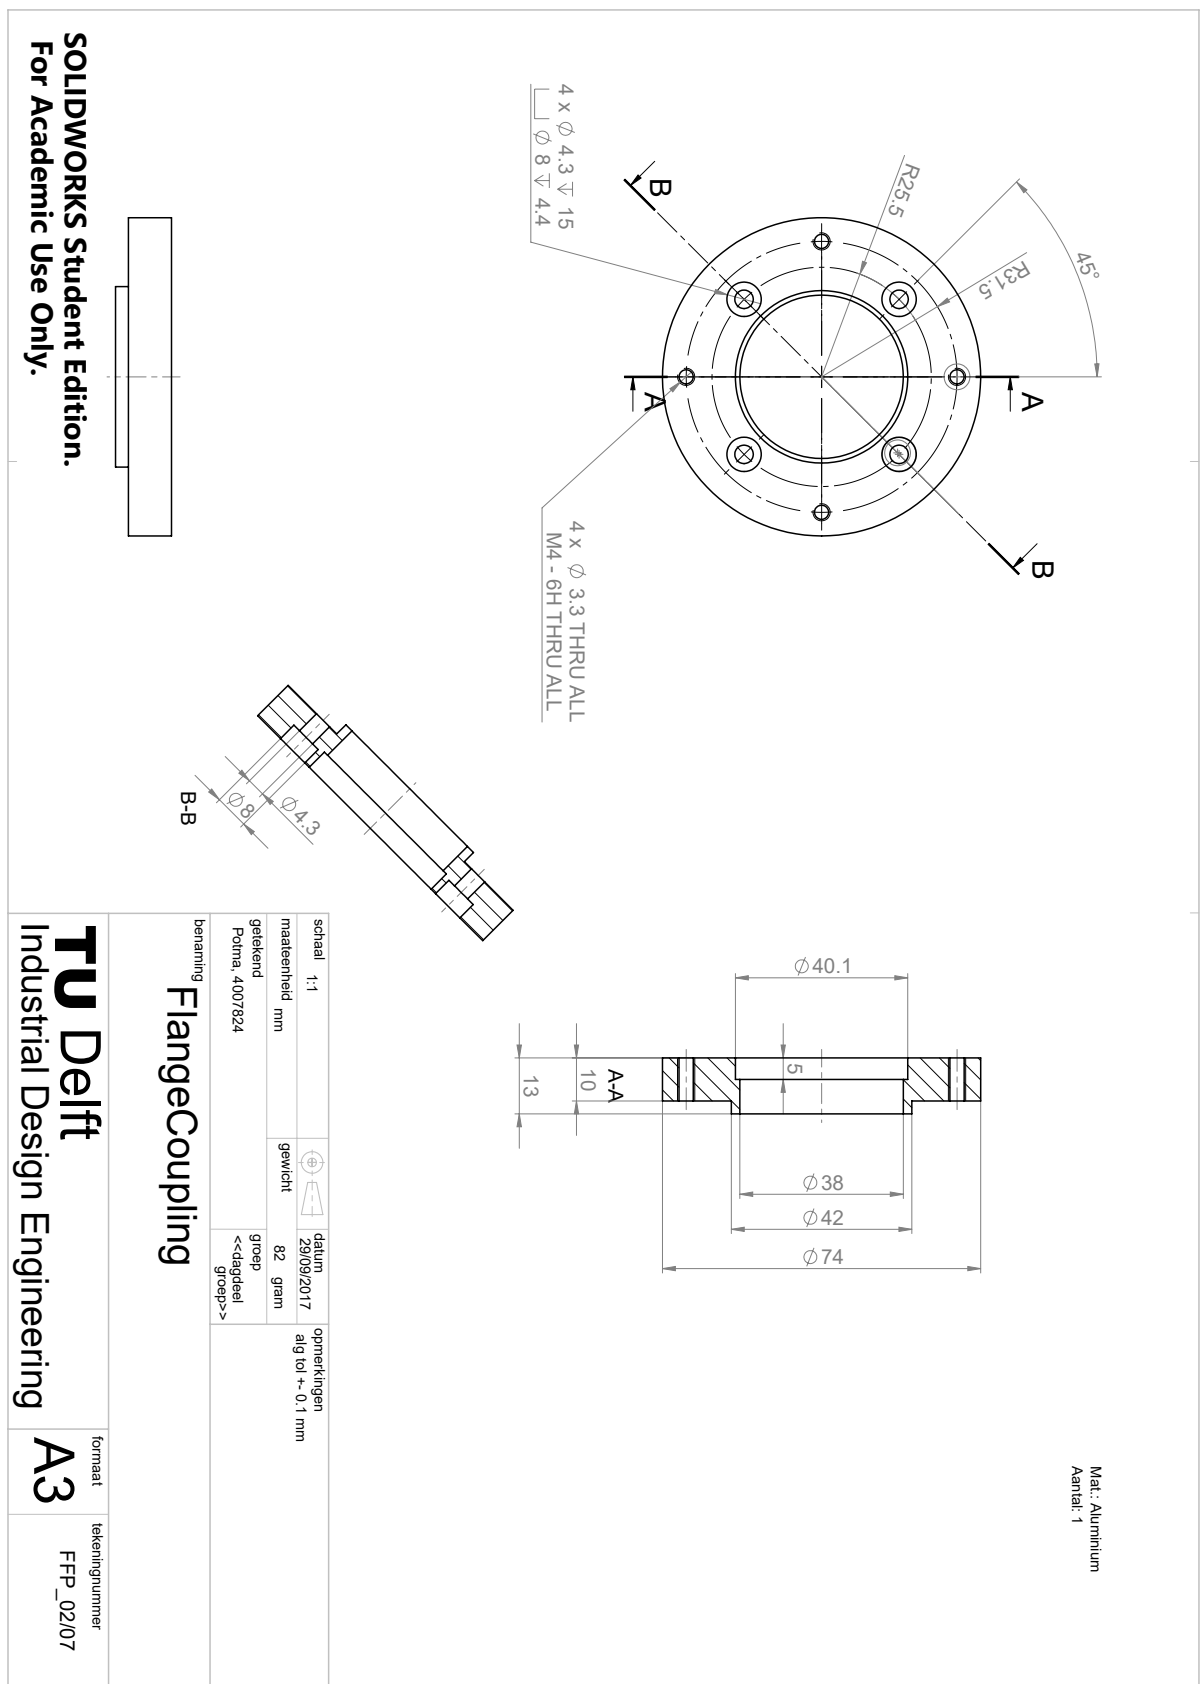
Blueprint of the flange that couples the motor with the setup.
